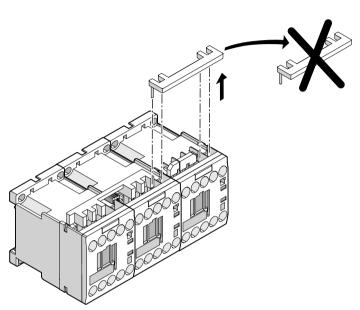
Removal of the wiring modules for connecting the control current paths on a contactor assembly for star-delta (wye-delta) start with screw-type connections of size S00
